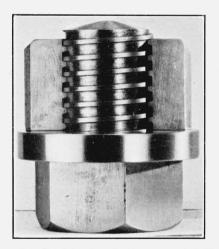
Dardelet thread, diameter of bolt % inch. Position of the nut when thrust faces are in contact and the helical cones are elastically compressed, resisting unscrewing of the nut.
